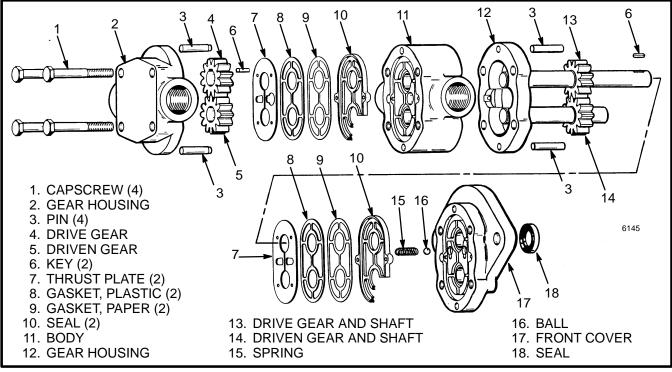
HYDRAULIC GEAR PUMP, TANDEM
